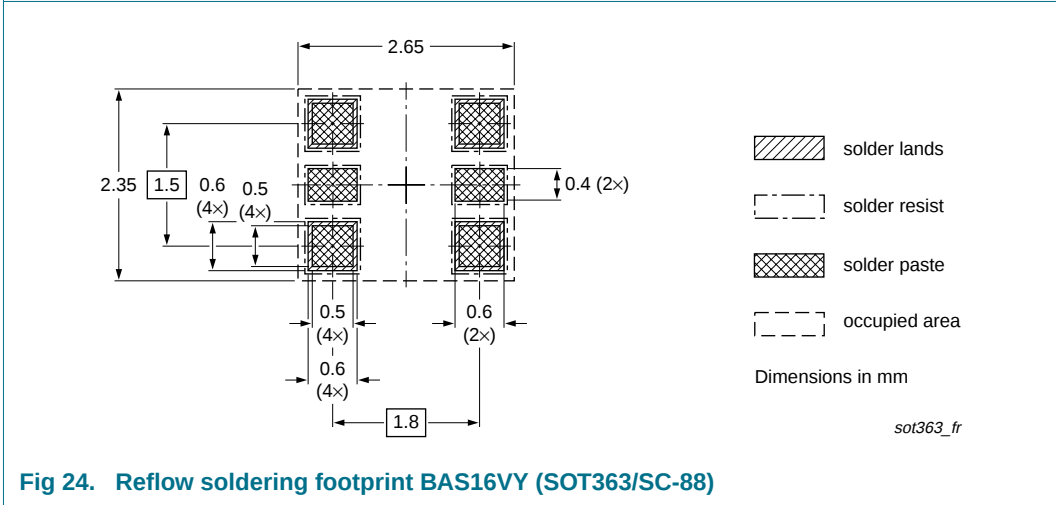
Reflow soldering footprint BAS16VY (SOT363/SC-88)
